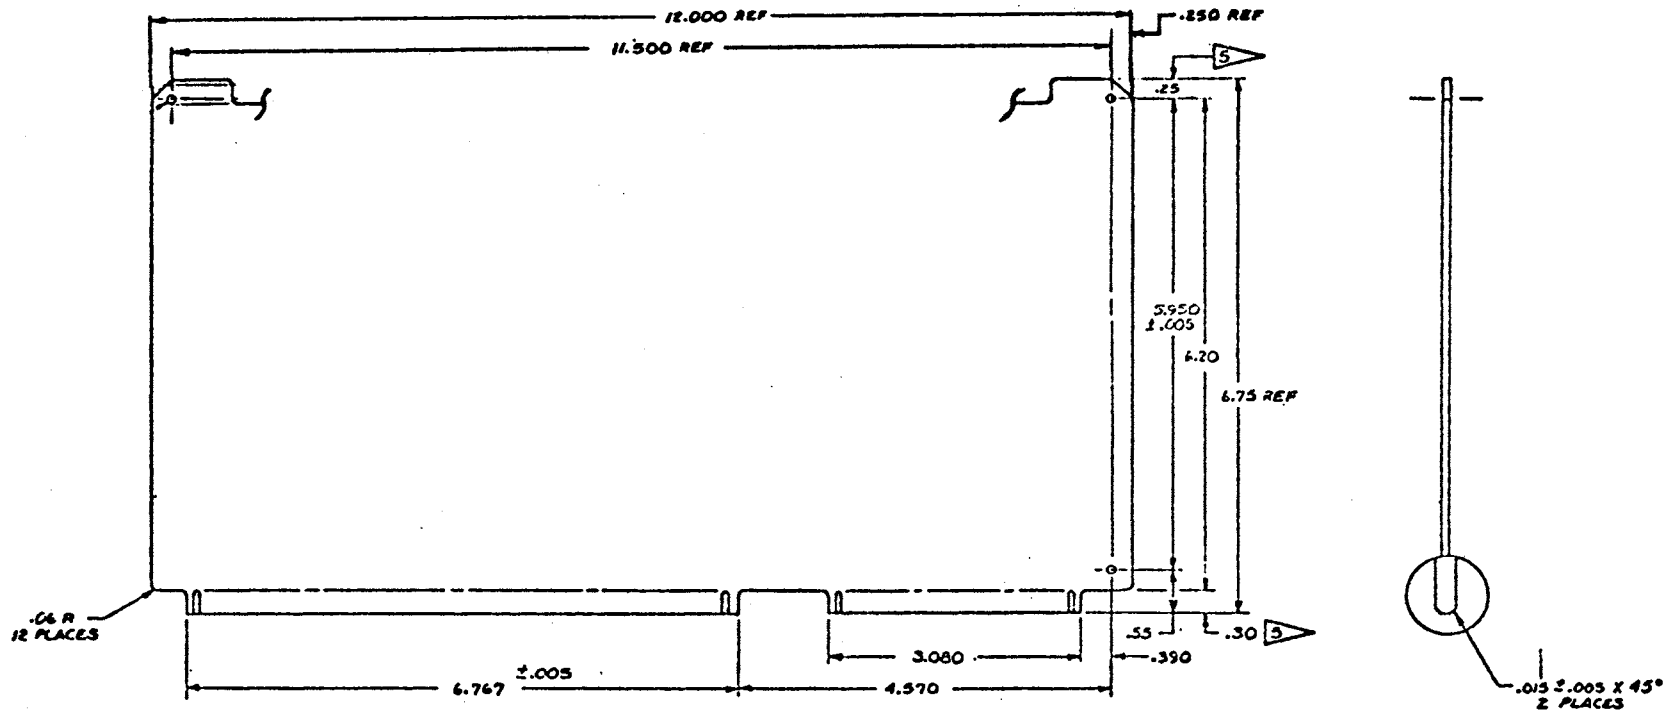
SBC 80/10 and SBC 80/10A Dimension Drawing - Page 2 of 2
